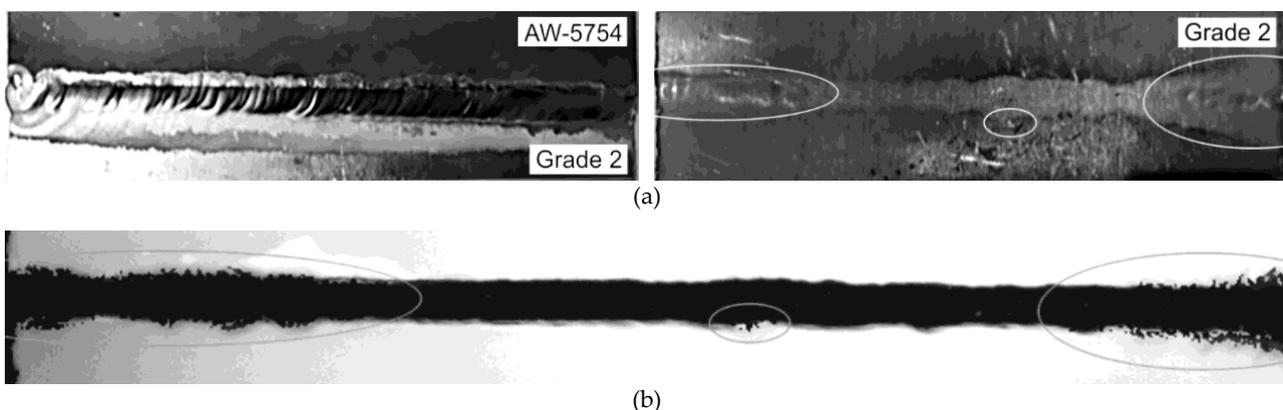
Braze welded joint Titanium Grade 2 + aluminum AW-5754, brazing consumable Al99.5 ϕ 2.4 mm: (a) both sides of the joint; (b) C-scan of the joint
